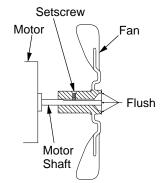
Fan, Motor Shaft, and Setscrew Location
